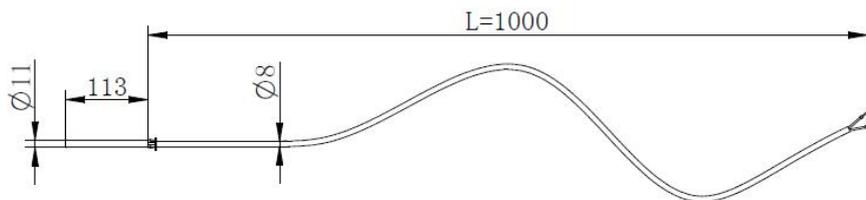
Overall dimension drawing of SPC series crankcase heater
